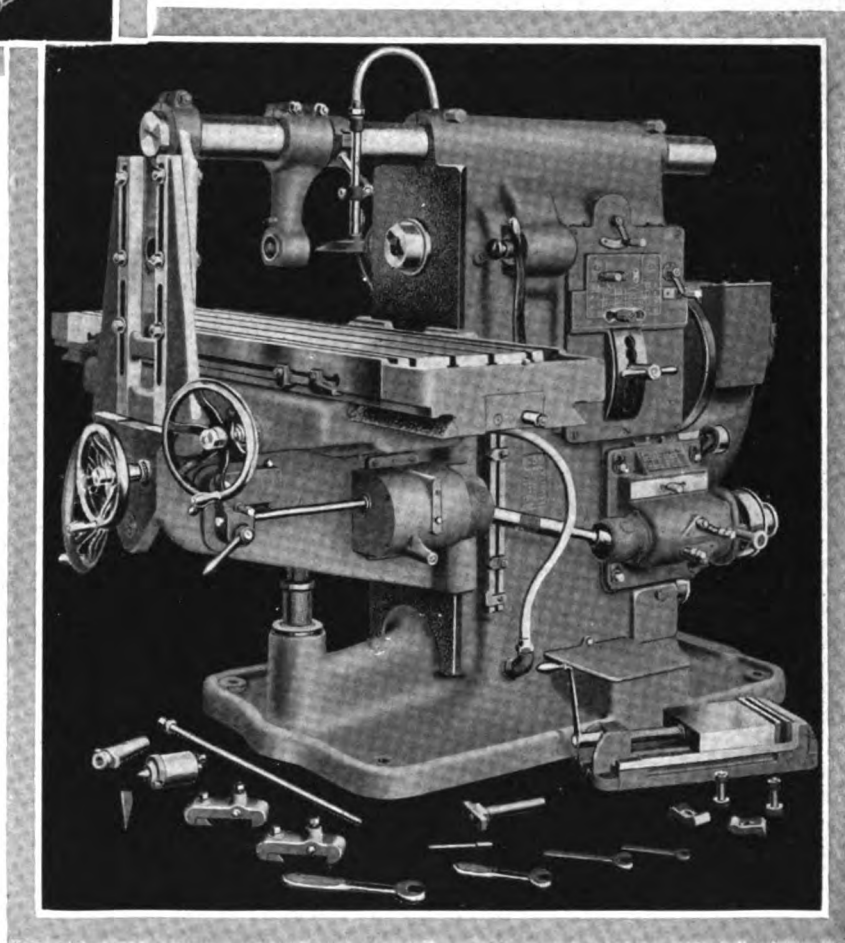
No. 5B Heavy Plain Milling Machine Constant Speed Drive
